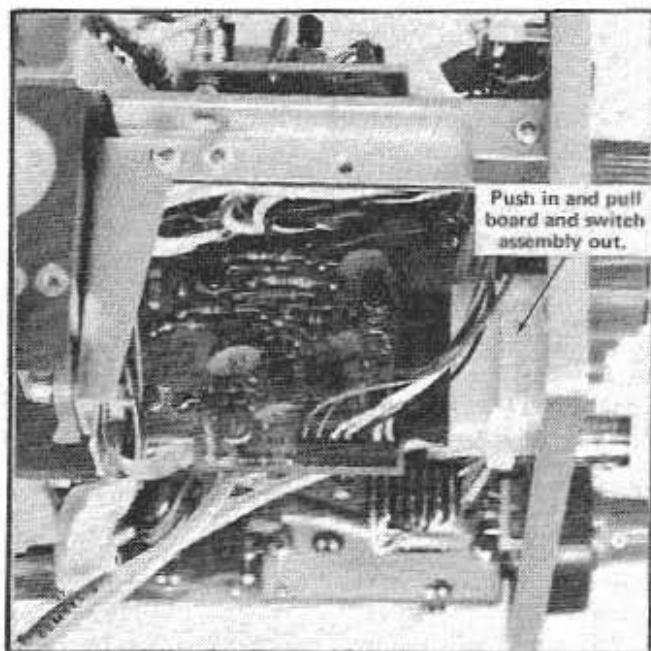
Latch assembly for the vertical display board and switch assembly.
